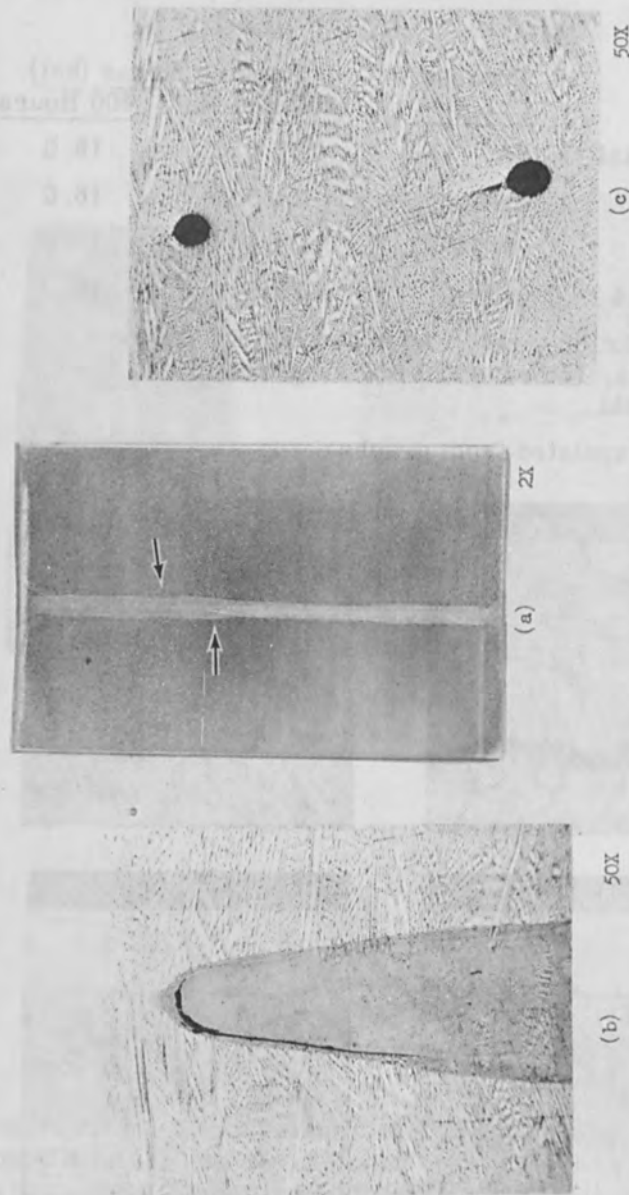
(a) Macrostructure of Weld RW 26 Made in 1.75 Inch Thick René 41. (b) Tip of Fusion Zone of Second Pass. (c) Porosity in First Pass ($\text{HF} + \text{H}_2\text{SO}_4 + \text{HNO}_3 + \text{H}_2\text{O}$ Etch). Weld Parameters - 50 kV, 320 mA, 45 ipm, Both Passes.
